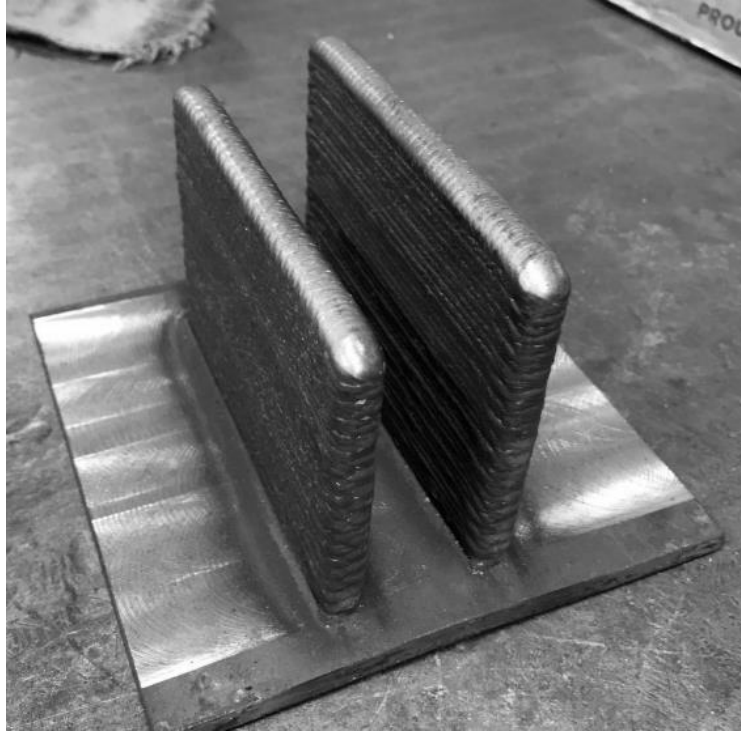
Two wall study 1.75 mm wall (close) and 1.25 mm wall (far)
